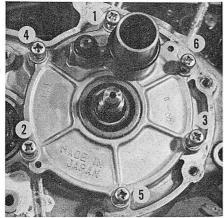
Rotary valve cover should be tightened in sequence shown. Check condition of seals and "O" rings in cover.
